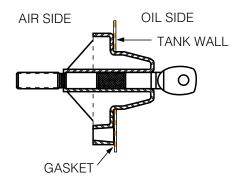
600-1400 A, 1.2 kV class one-piece molded triclamp secondary bushing.
